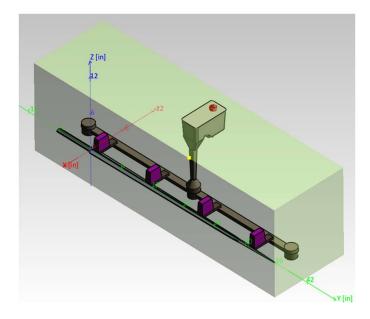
Geometry perspective of the initial casting and gating design in Magma
